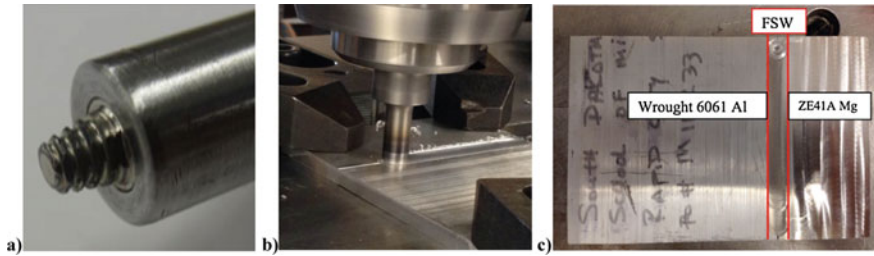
a FSW tool, b In process FSW and c Completed FSW joining of cast ZE41A Mg with cold spray transition joint to wrought 6061 Al
